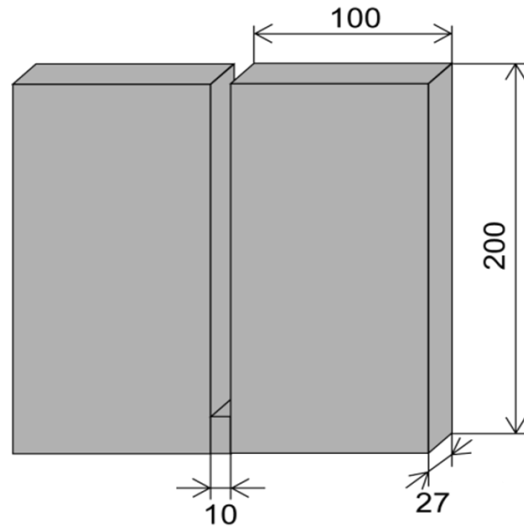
Specimen dimension and weld joint configuration
